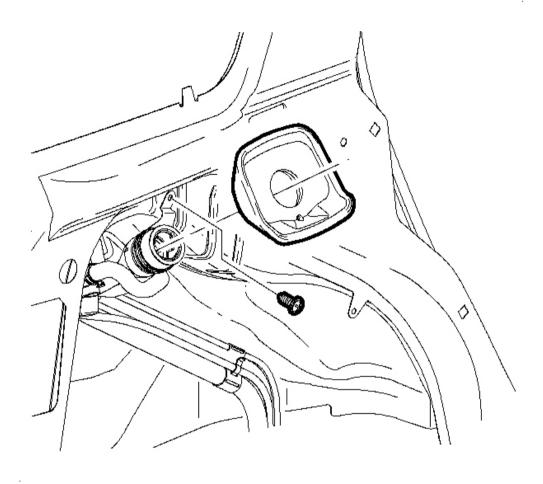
View Of Rubber Grommet Onto The Fuel Filler Pipe Courtesy of GENERAL MOTORS CORP.
